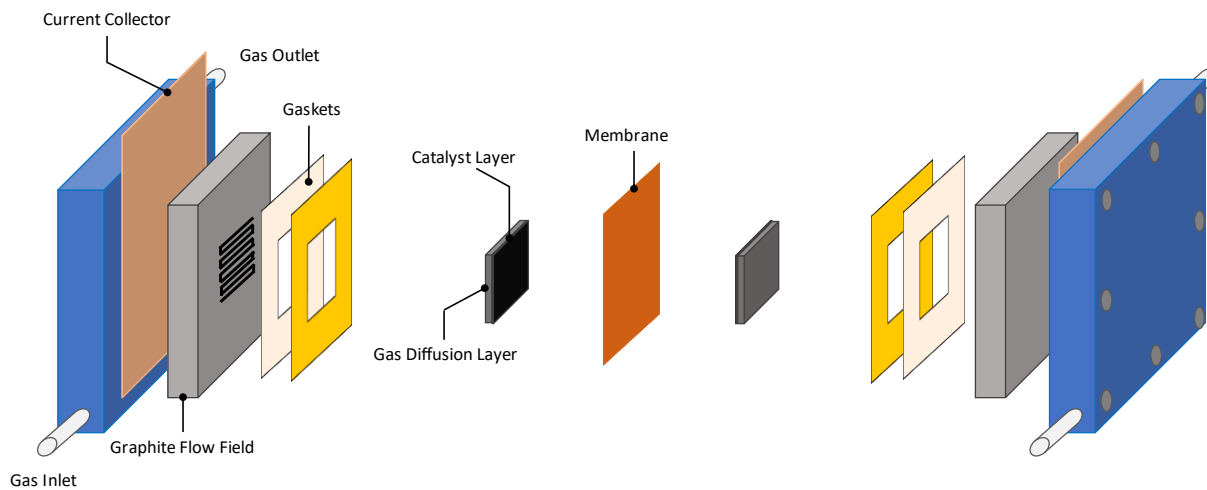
5 cm<sup>2</sup> cell assembly.
